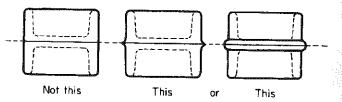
A bead at the parting line facilitates removal of mold flash.
